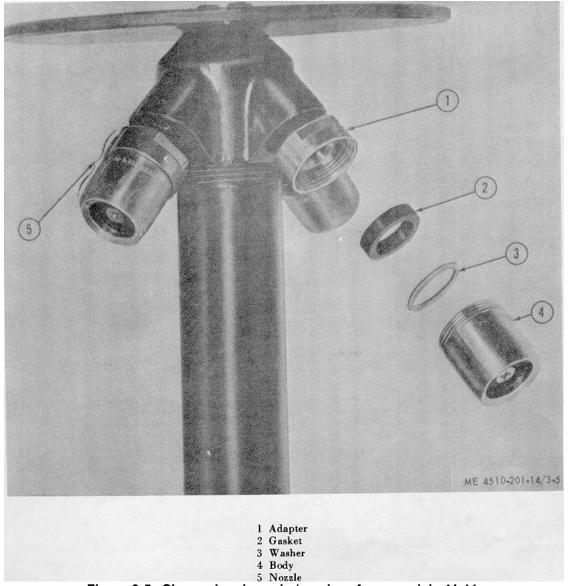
Shower head nozzle (used on Army models 41,44, 45 and York-Shipley model YS49279) disassembled.
